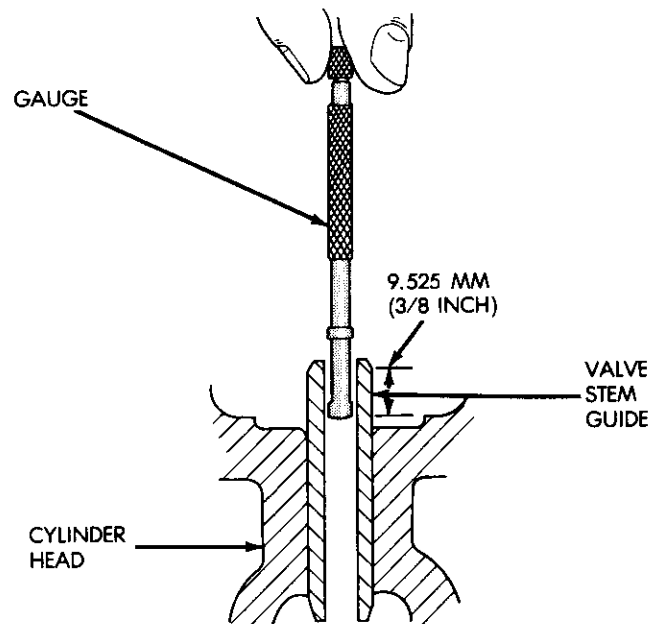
Measurement — Valve Stem-to-Guide Clearance
